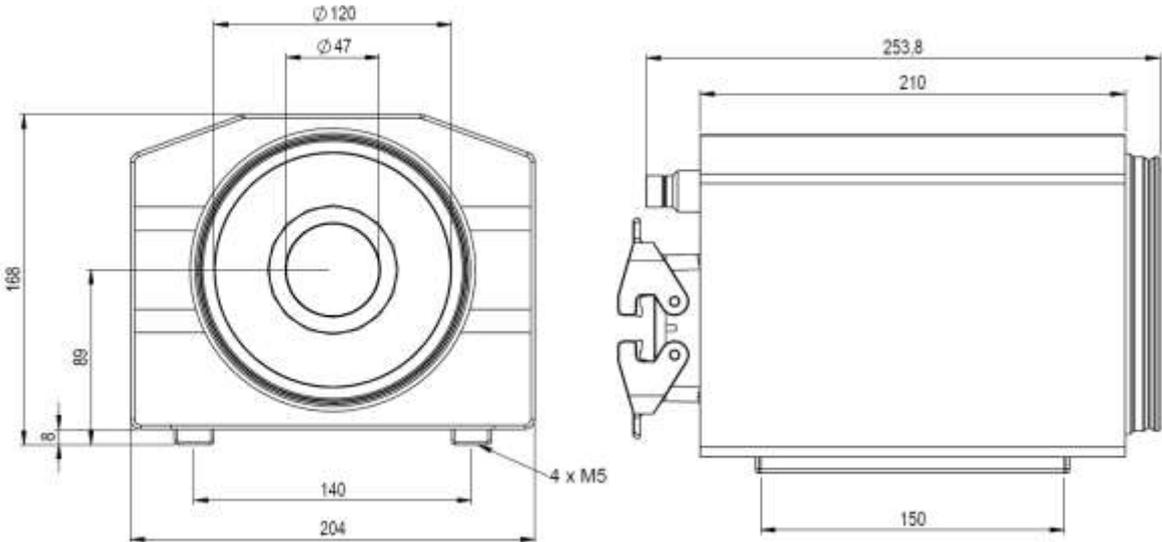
Frontal (left) and side view (right) of the CoatMaster in-line measurement and sensor head
